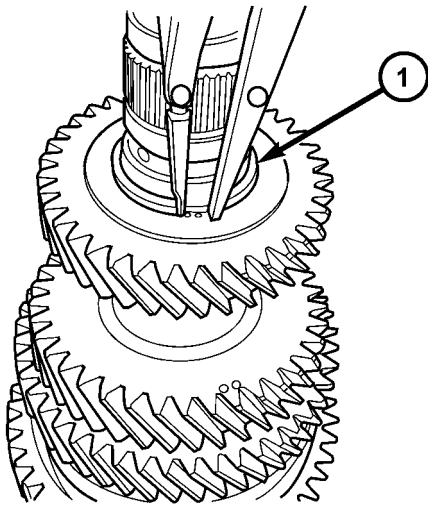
5th Gear Needle Bearing Removal/Installation
